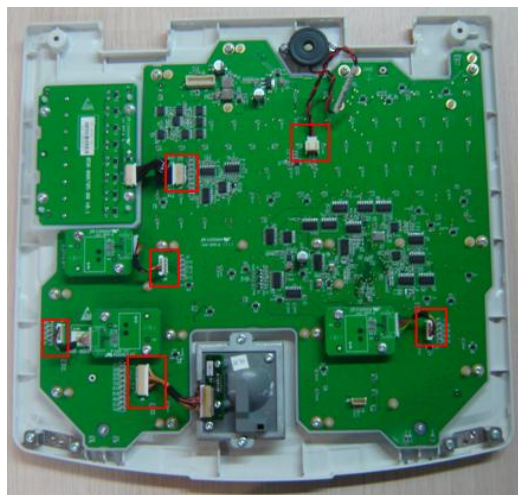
Disassembly of Control Panel and Silicon Rubber Keypad (2)
